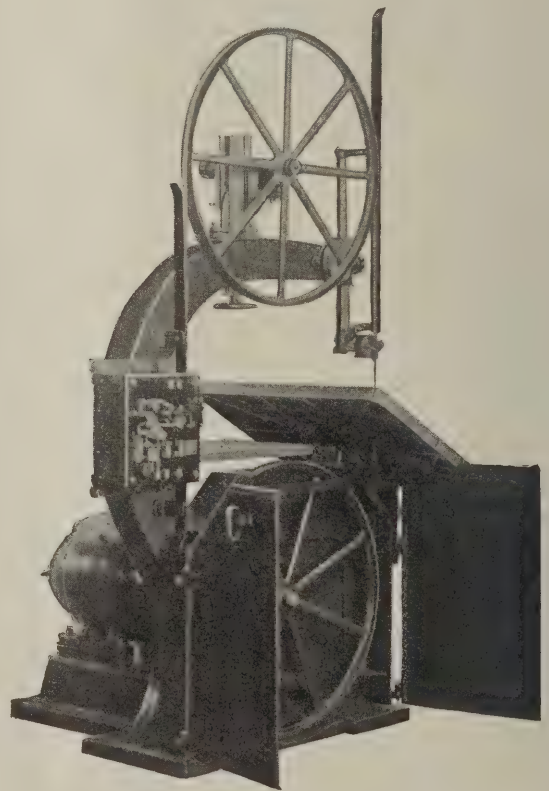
A 38-In. Saw with Motor Mounted on a Base as Part of the Machine.
